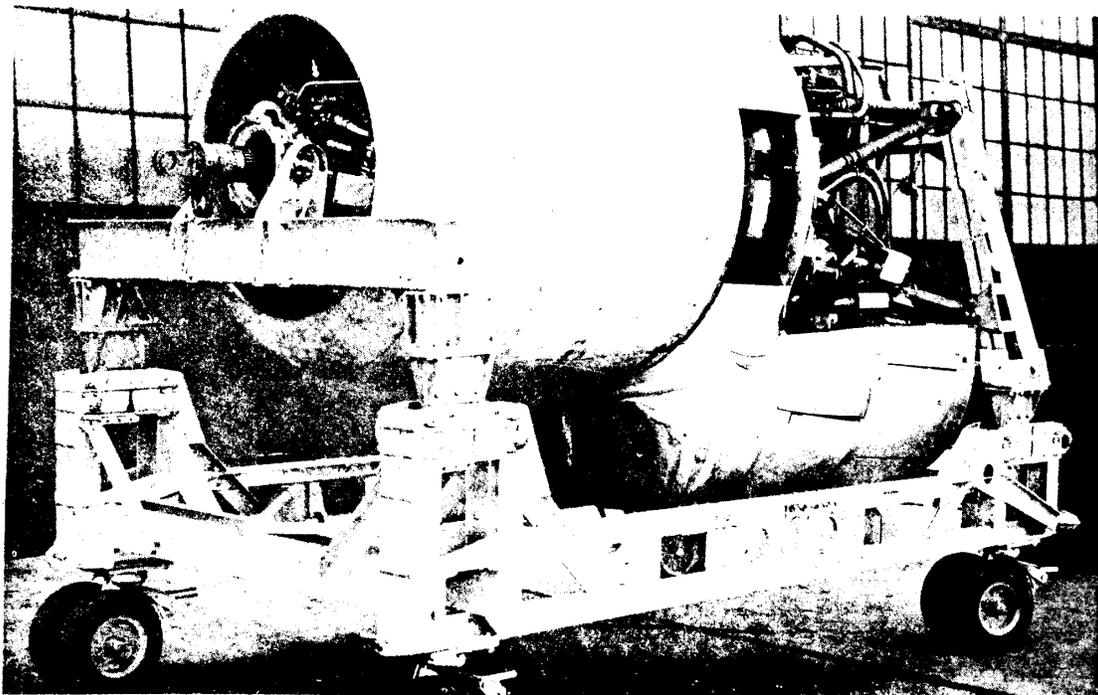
Trailer 55J9109 with KC-97 Power Package Installed, Left Front Three-Quarter View
